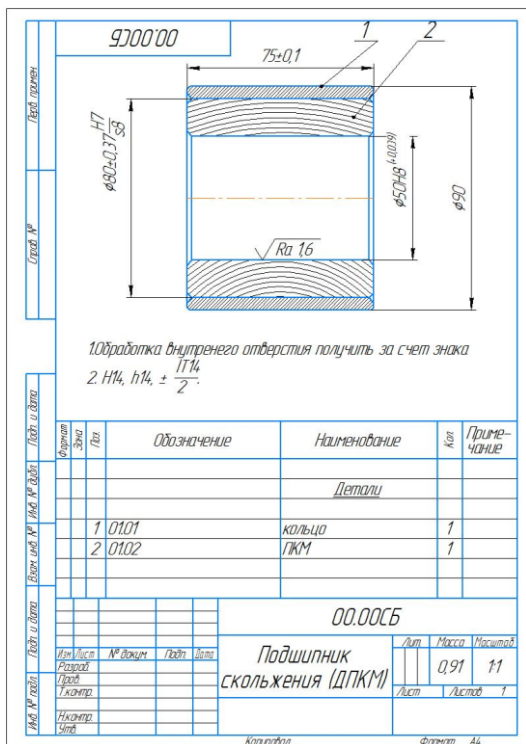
Working drawing of sliding bearing made from wood-polymer composite material..
